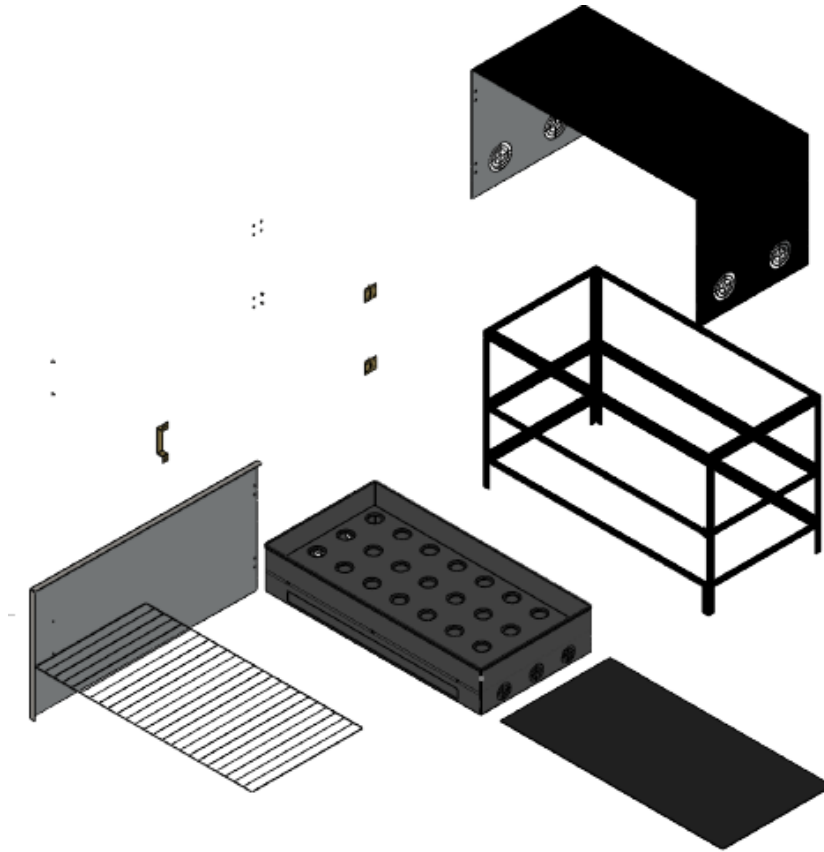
EXPLODED VIEW OF THE CHARCOAL BREAD BAKING SYSTEM
